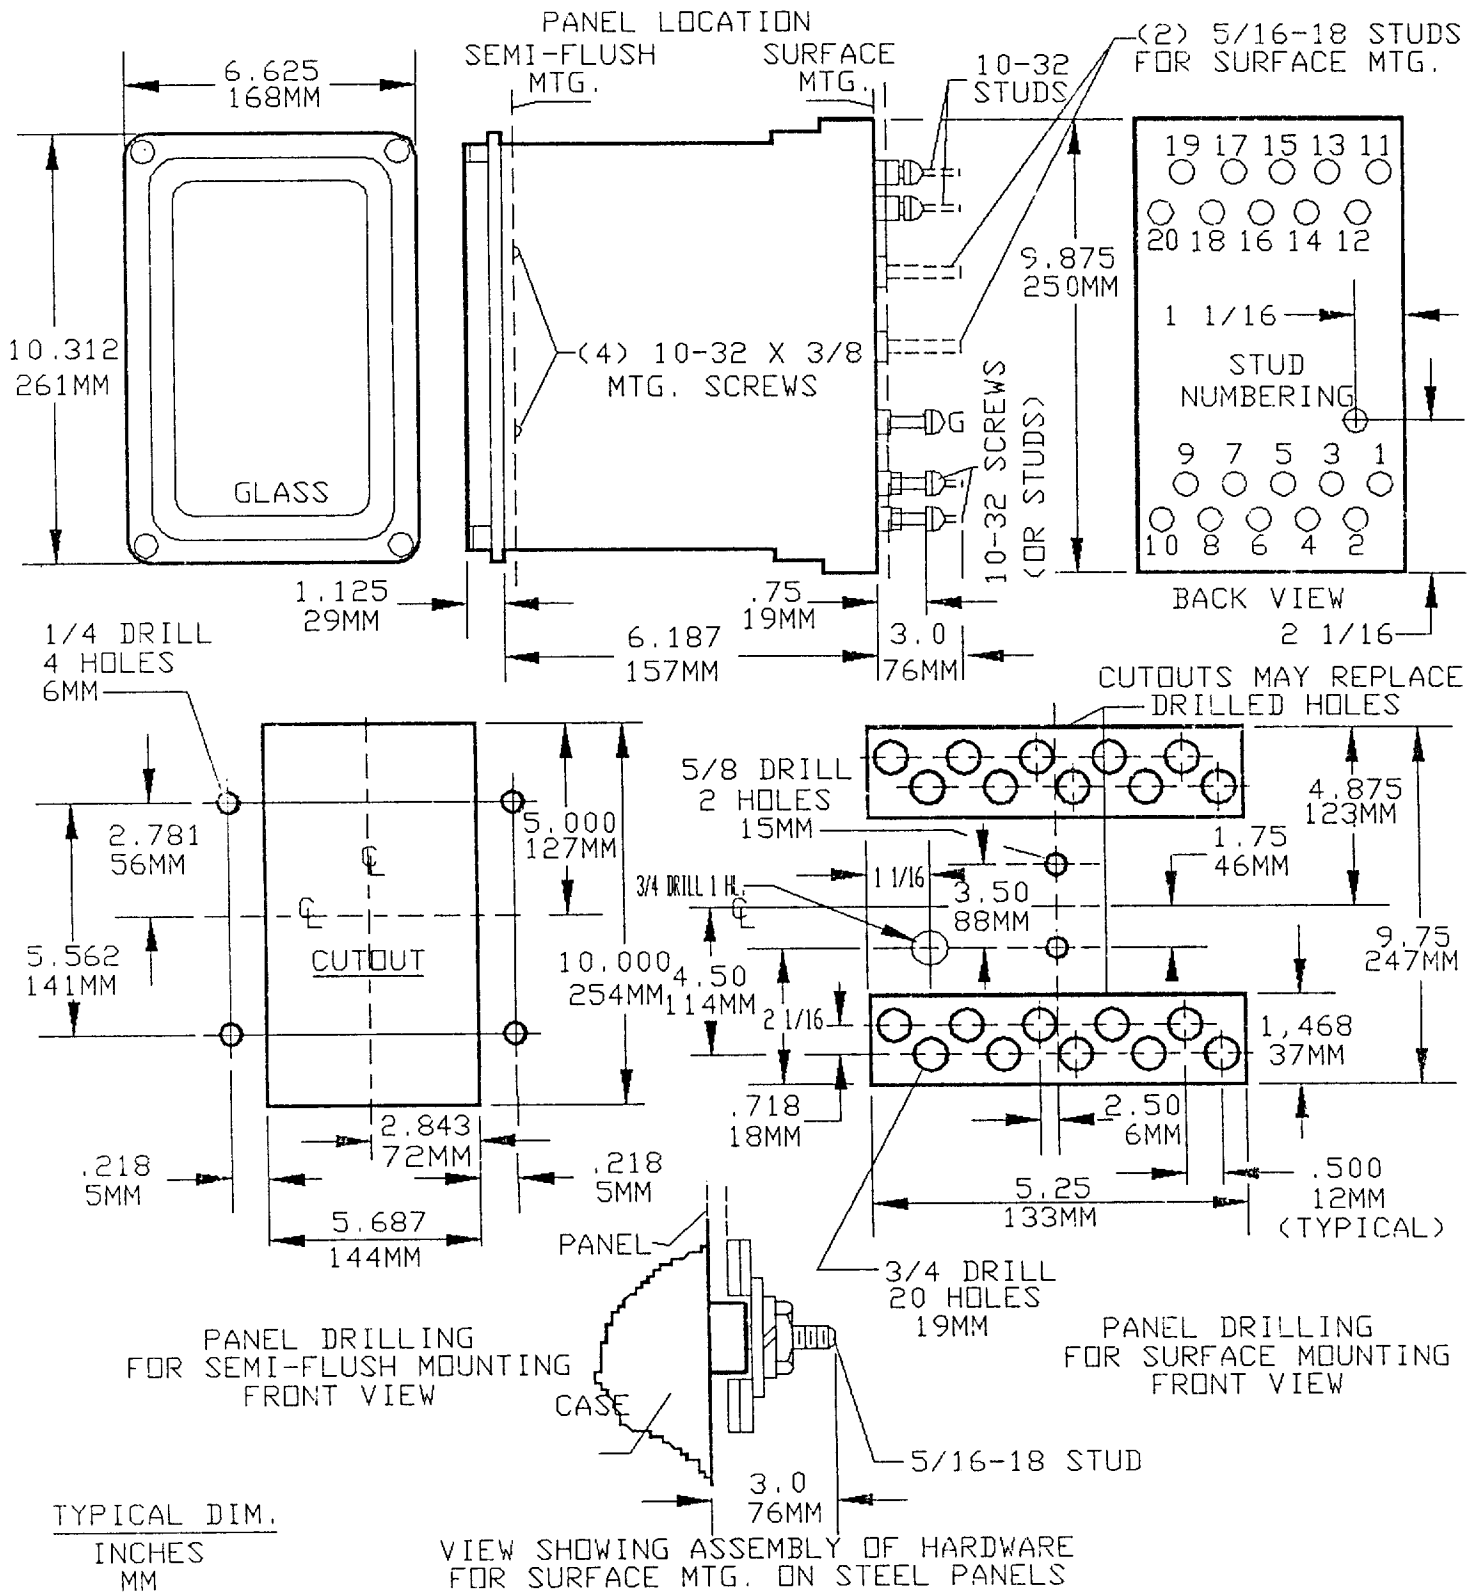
(0285A5393) Outline and Mounting Dimensions for the SAM207
